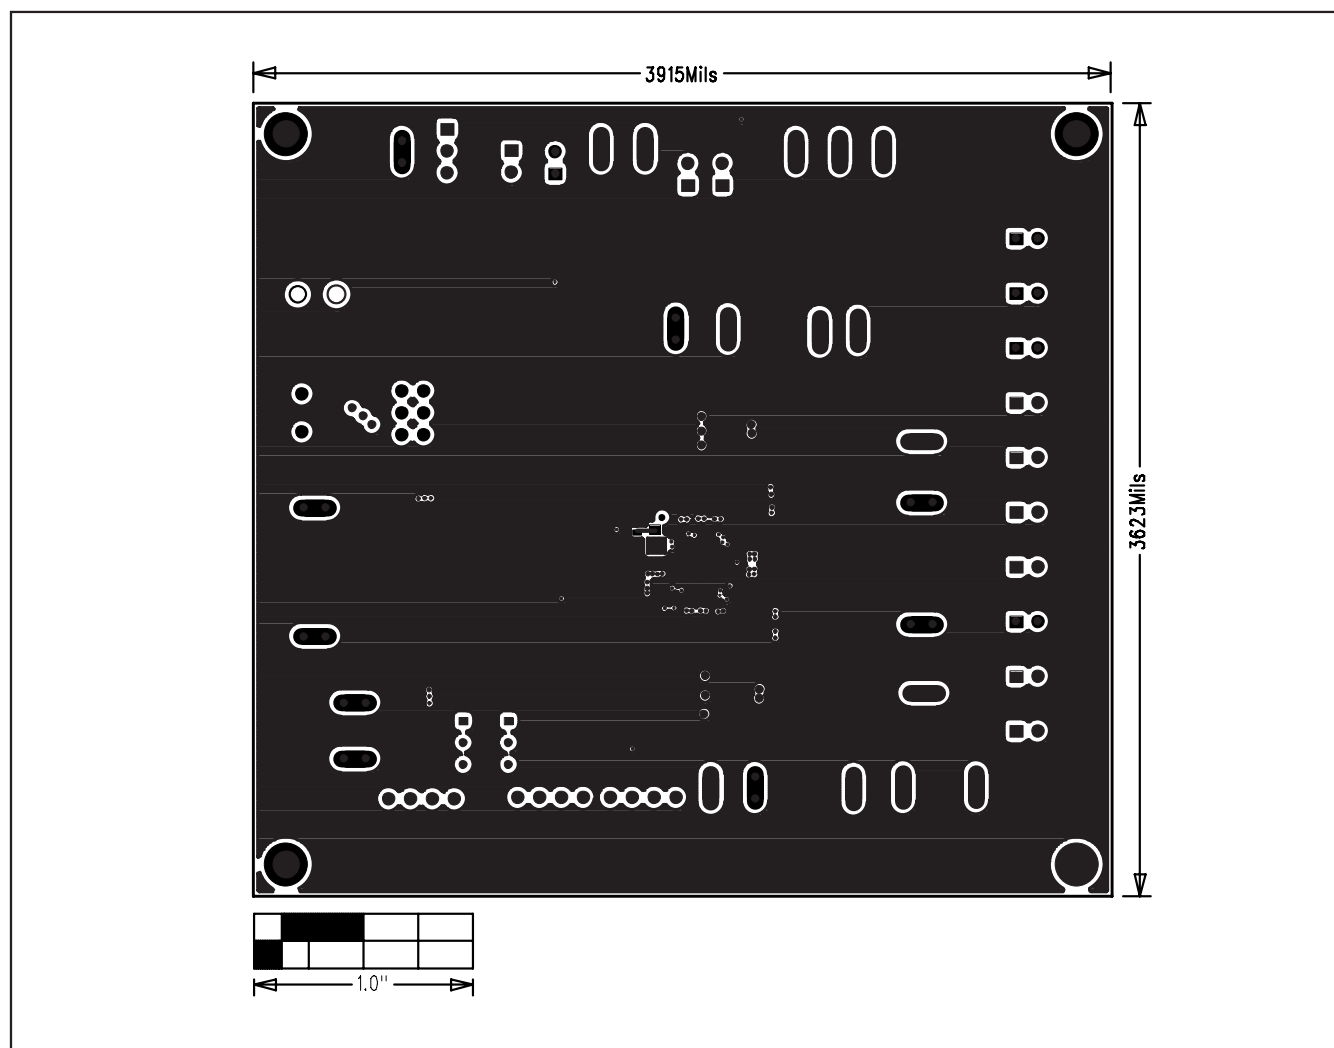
MAX8663 EV Kit PCB Layout—GND Layer 4
